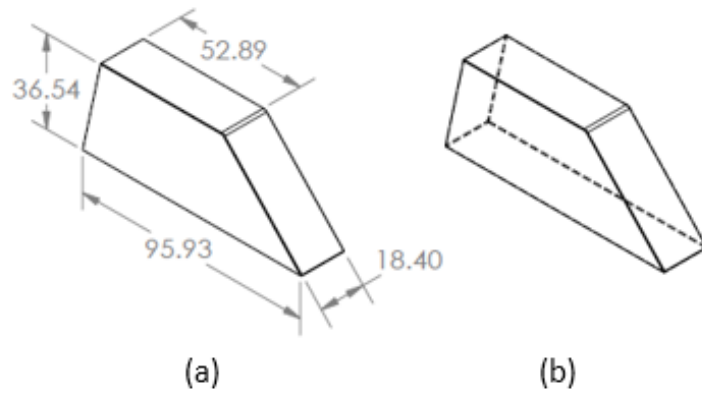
Object 3, a part used to prove the concept of the New Modified Theory: (a) Isometric view of Object 3 with dimensions, measured in millimeters; (b) Isometric view of Object 3 with hidden lines;
